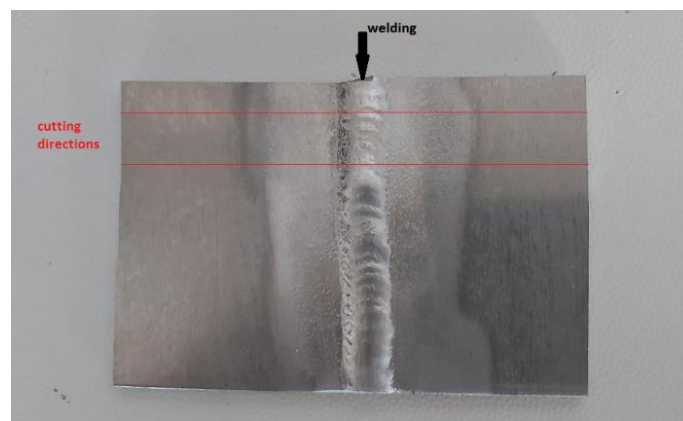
Cutting directions of the 7020 MIG welding. The red lines indicate the cutting direction, vertical to the weld.
